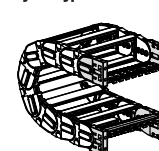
Fig. A Chain fixed frontally, inner or outer radius. (Fig A)
